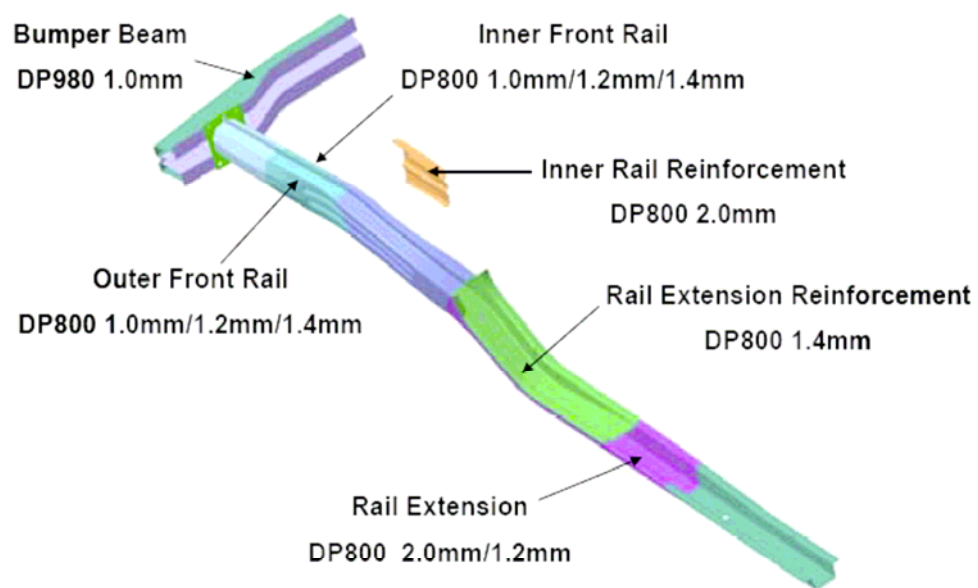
New design – Bumper/Rail Assembly [ASP06]
